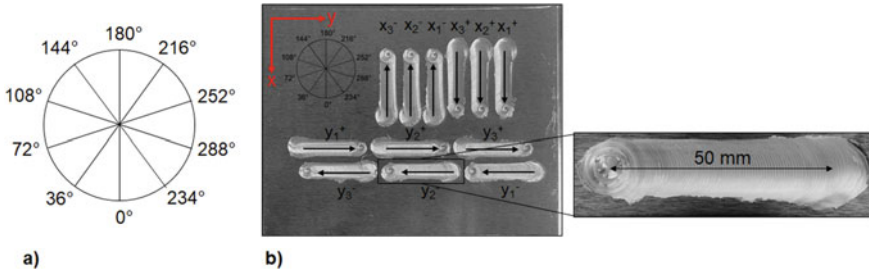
a Varying rotation angles and b FSW weld seams joined in $\pm x$ and $\pm y$ direction with an enlarged section of a weld seam
